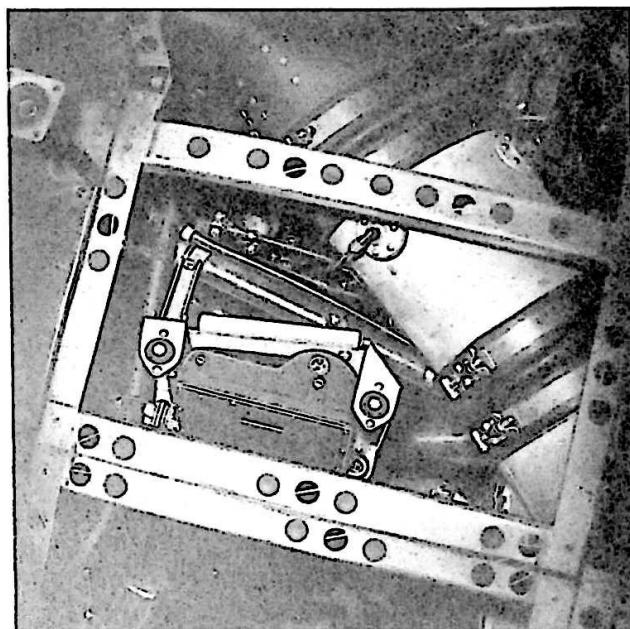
Pressuretrol Mounting, B-24 Airplanes
